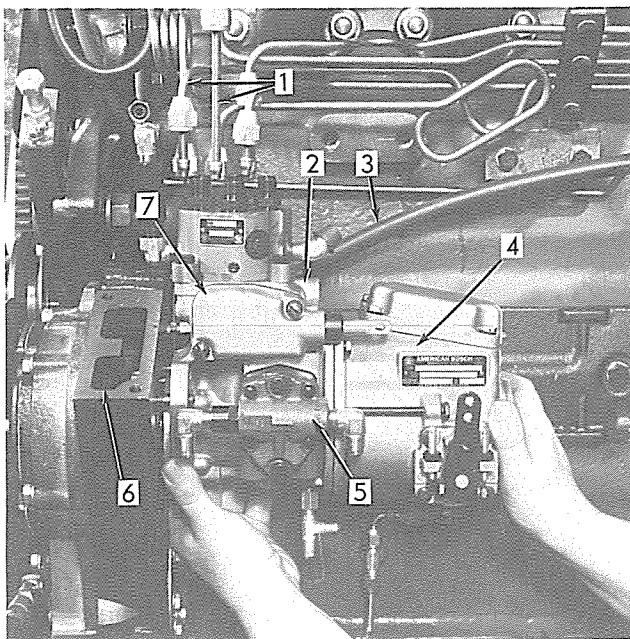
Removing Typical Fuel Injection Pump (T-71445)
